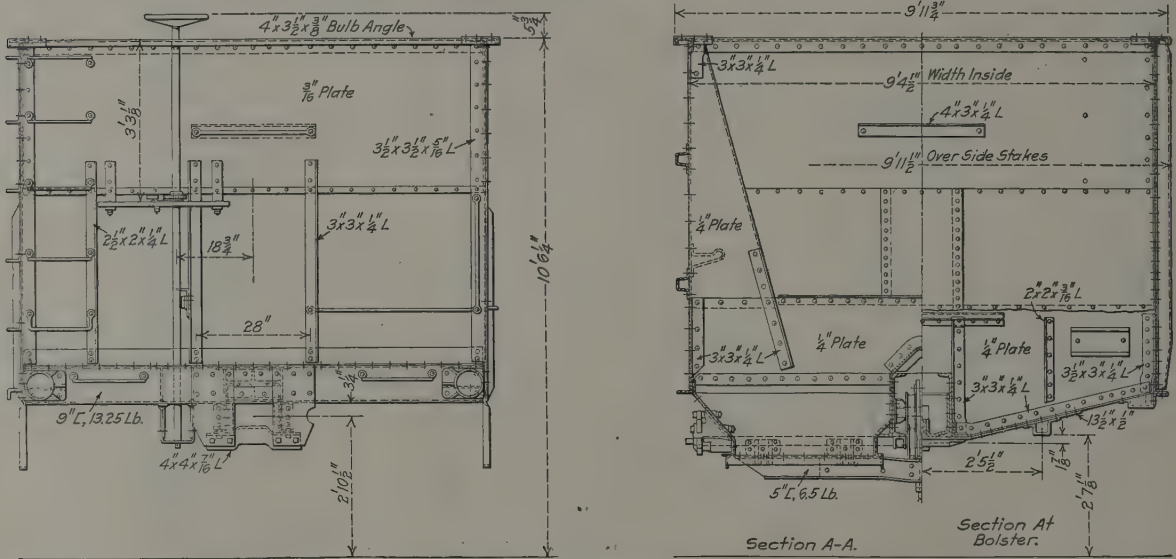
End Elevation and Cross Sections 50-Ton Hopper Car Shown in Figs. 65-66.
